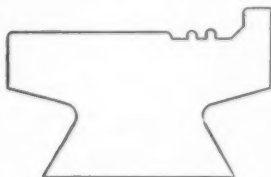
One of many form tools which are difficult to measure mechanically. To inspect this tool with an inspection Comparator and measuring machine, only a simple chart with right angle lines and a series of radii is necessary, in addition to the Comparator. This principle is used in measuring form tools, profile gages and for general contour inspection. When it is desired to measure several tools, gages or production parts of duplicate shape, the contours may be compared against an enlarged master outline, as mentioned in the case of buttress threads on airplane cylinders.
